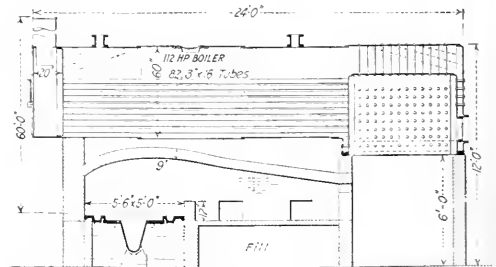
AMERICAN UNDERFEED STOKER AND FORGING FURNACE WITH 112-HP FIREBOX BOILER
